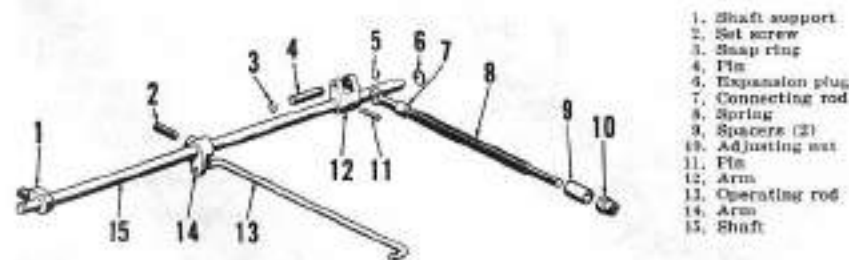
View of linkage connecting automatic hold trip lever to pump control valve operating bellcrank. Two spacers (9) are used instead of one shown; one spacer is located between spring (8) and trunnion (24—Fig. 160) and second spacer is between trunnion and adjusting nut (10).
